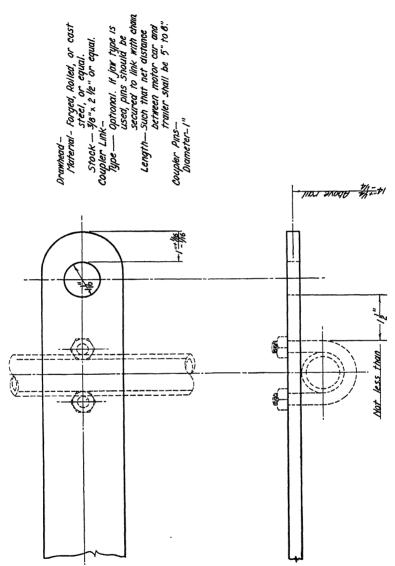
AREA Coupler Drawhead for Motor Cars, Trailers and Push Cars.
